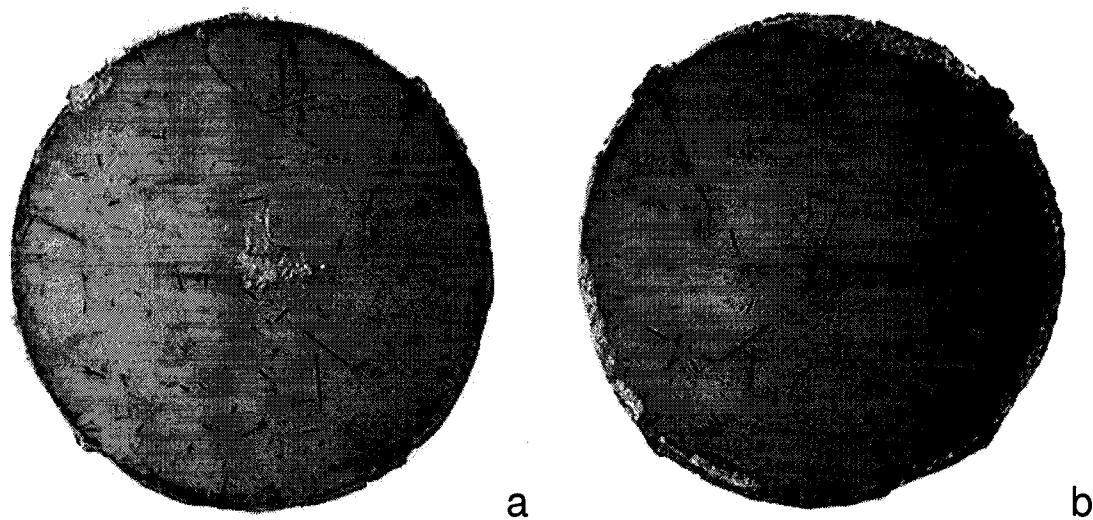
Photograph of disk 1K6R-2/3B molded with 6 layers of preform and 1 flow channel which has had the final 2/3 of its length blocked. a: top; b: bottom
